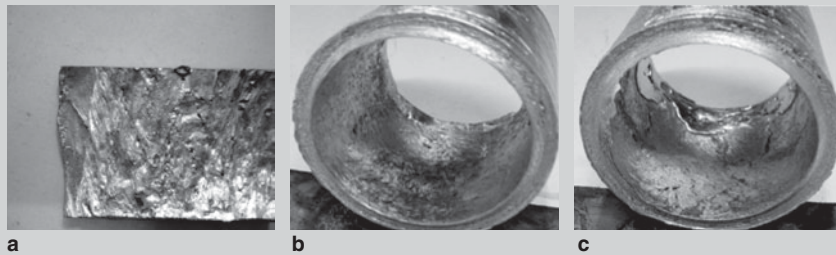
Al-12Si castings (6 mm thick): (a) 400 rpm, (b) 600 rpm, (c) 1,000 rpm.
